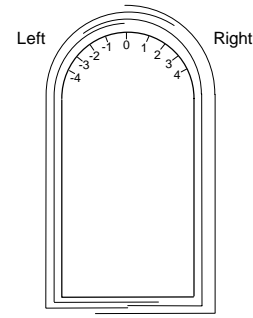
End-Markings on the Wooden Mold for Lay-up
